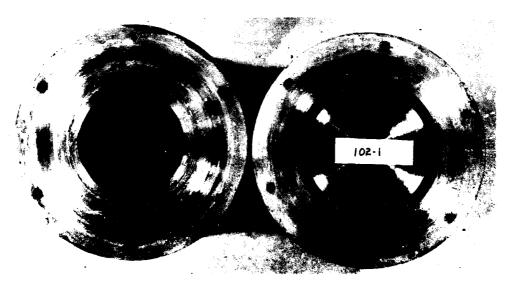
Aluminum flat flange test jig without anode after exposure showing corrosion of flange to seal.
